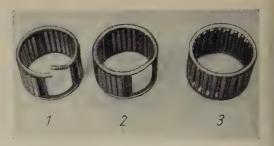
Needle bearing cages; 1 and 2 in sheet, 3 in solid steel.
